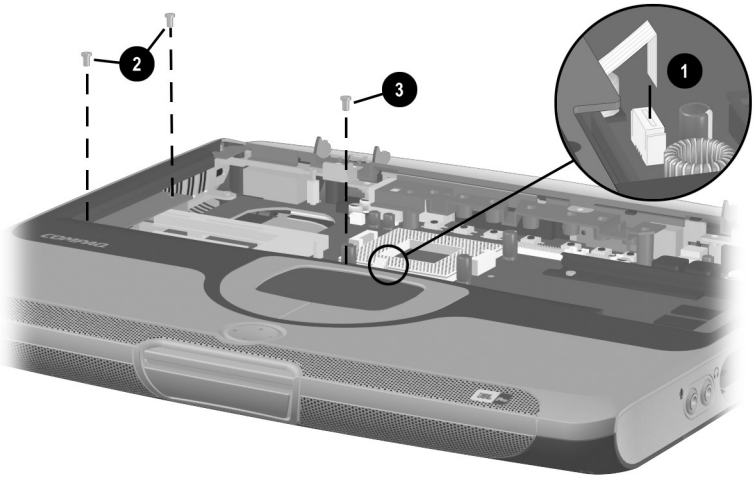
Disconnecting the TouchPad Cable and Removing the Top Cover Screws
